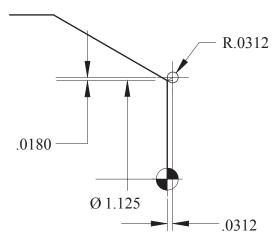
Answer for Calculate Tool Nose Radius Offset Coordinates
